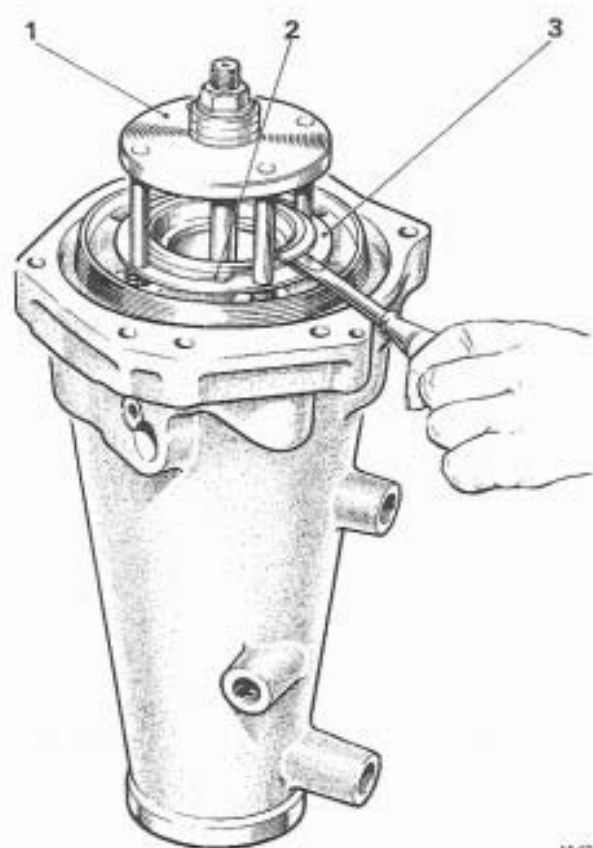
CLUTCH SPRING COMPRESSING TOOL IN POSITION
